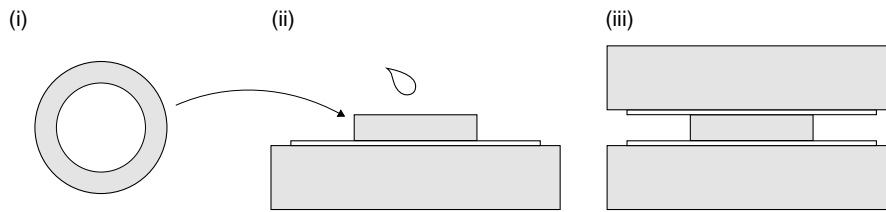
Schematic of the casting mould used for producing circular matching layers. (i) A circular mould is machined out of polyoxymethylene (POM). (ii) The mould is placed on a Mylar sheet placed on top of a flat POM block. The epoxy is carefully poured inside the mould. (iii) A second Mylar sheet is placed carefully over the mould and epoxy to avoid trapping air bubbles underneath the Mylar sheet. A second flat POM block is placed on top of the Mylar sheet. Pressure is applied on both top and bottom POM using clamps and the epoxy cures in an oven according to vendor instructions.
